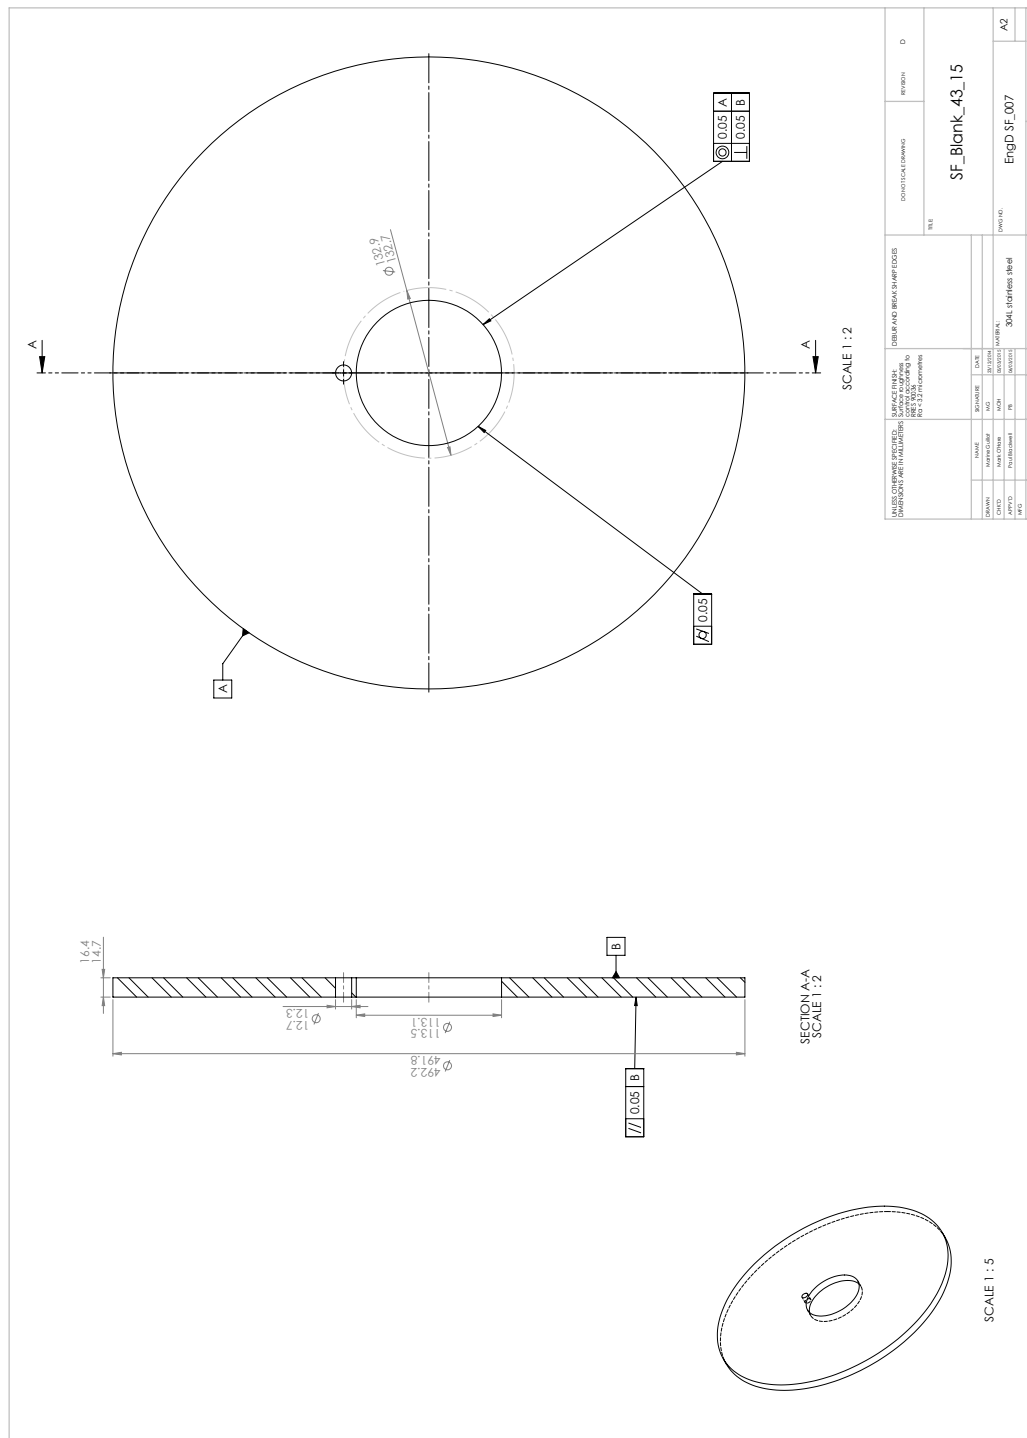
Drawing: Blank – 43°, 15 mm thick, EngD – EngD\_SF\_007, “SF\_Blank\_43\_15”.
